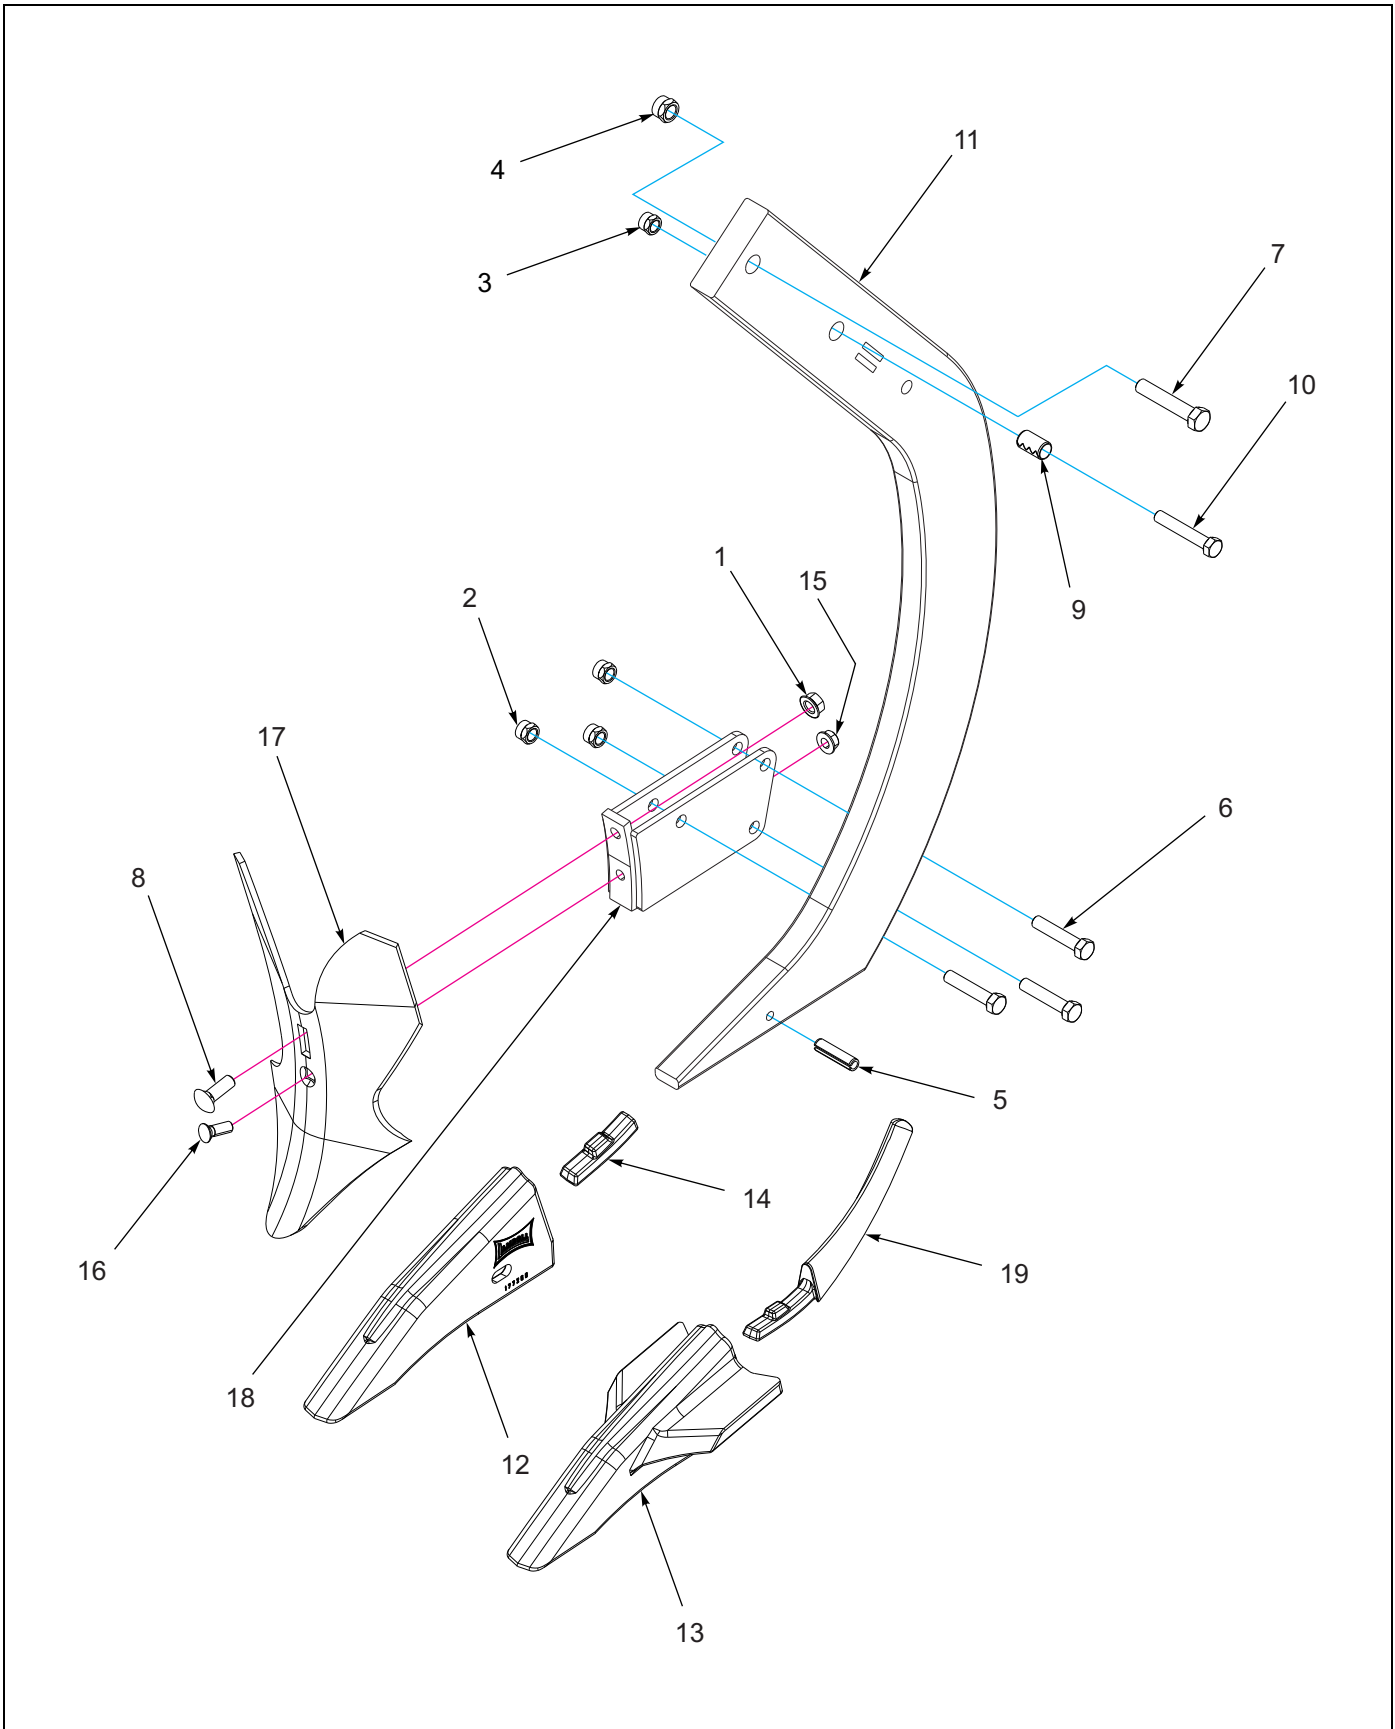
1-1/4 Parabolic Shank Point Assembly
